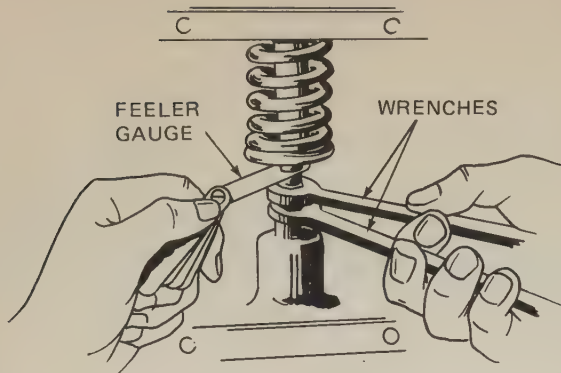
Adjusting valve-tappet clearance on an L-head engine.
